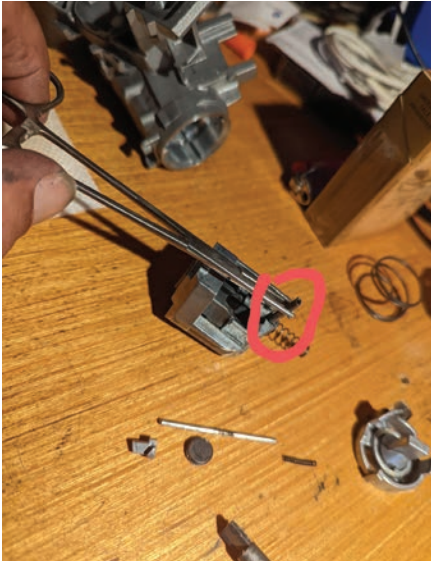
Here, the author is holding the pin and spring in its original position on the steering wheel locking bolt retractor.
